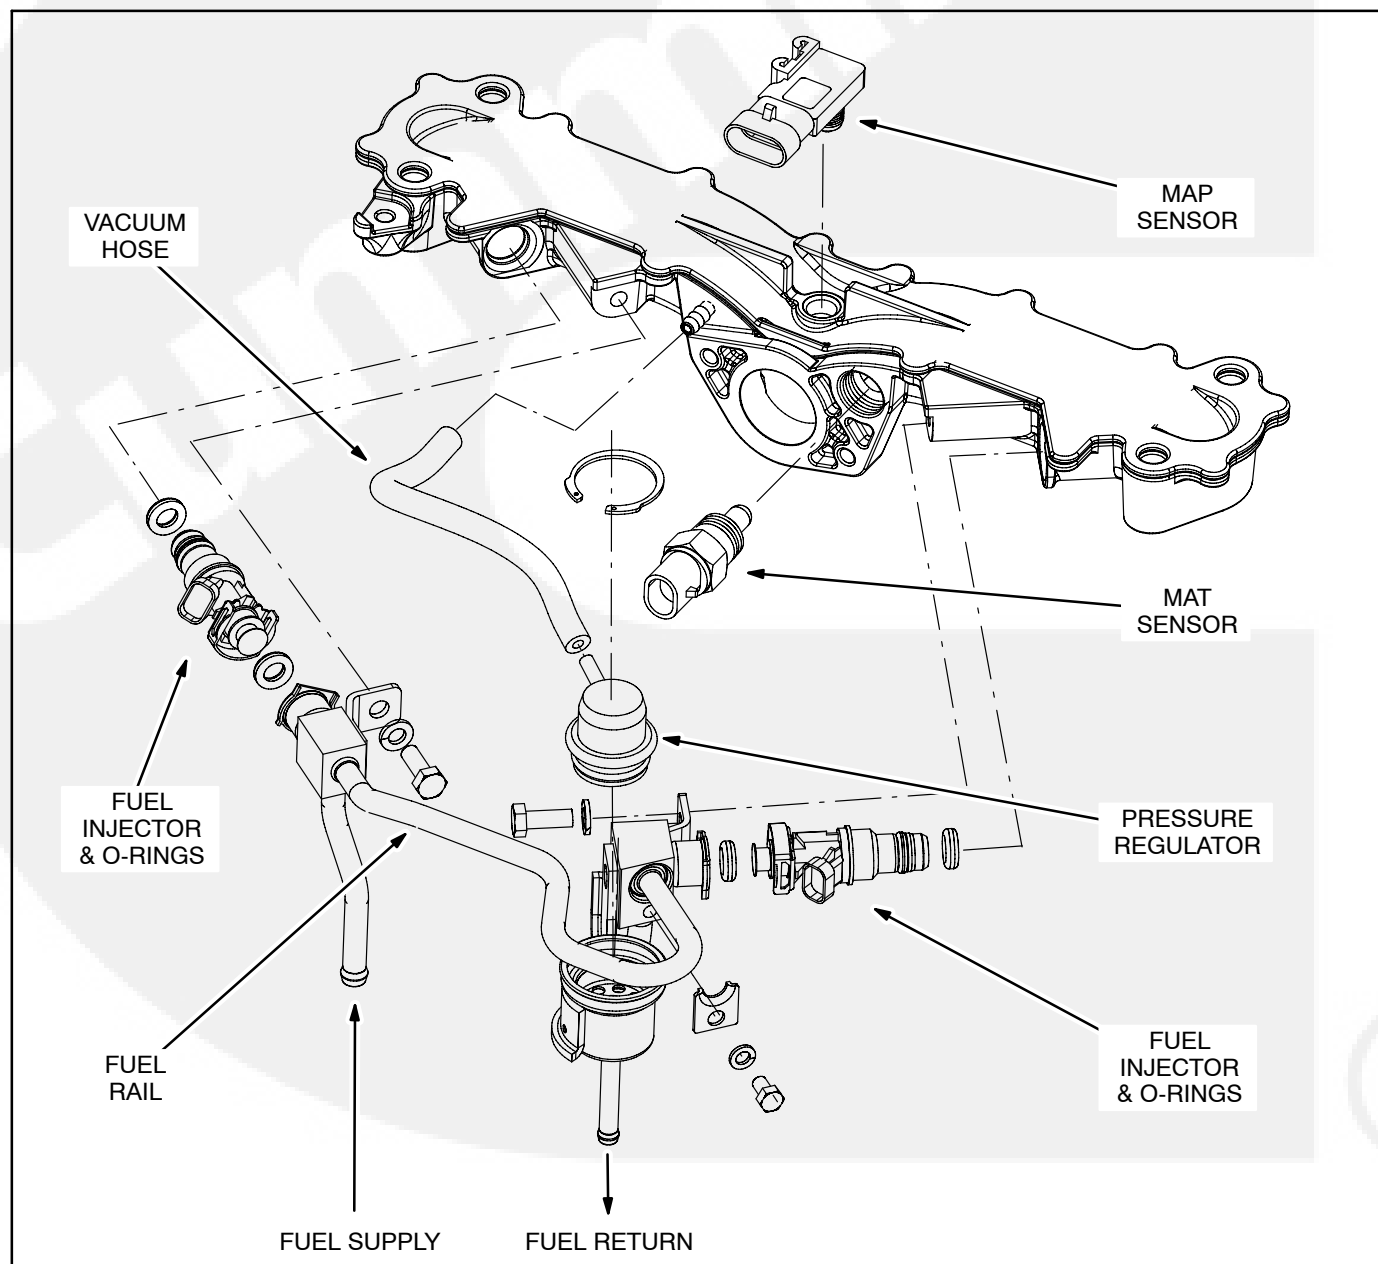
FUEL RAIL / INTAKE MANIFOLD ASSEMBLY
